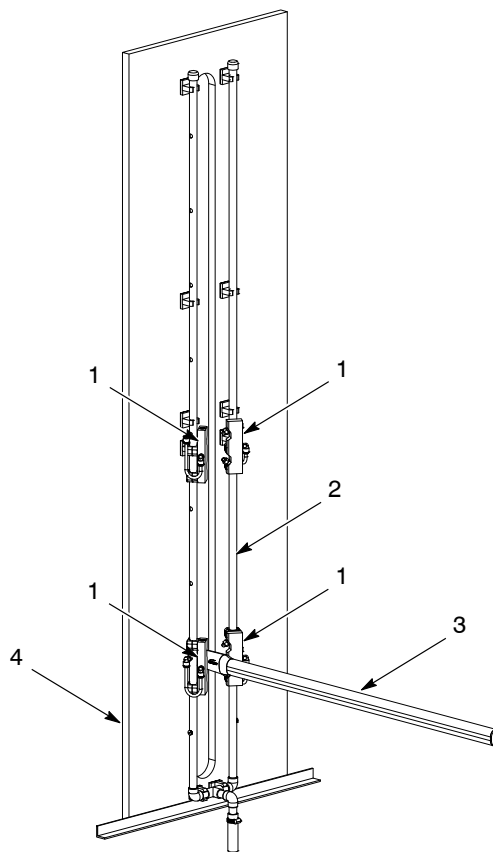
External Gun Blow Off Kit Installed on Header Pipe Assembly
